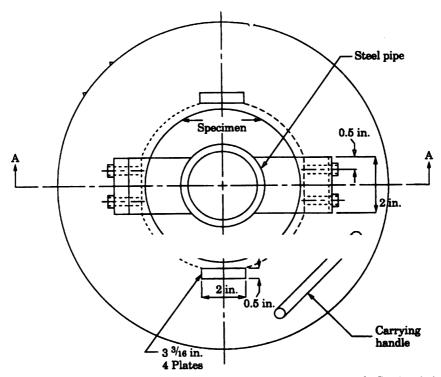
Plan view of test equipment for measuring impact strength. Section A-A is shown in 9-9 [9.14] (1 in. = 25.4 mm).
